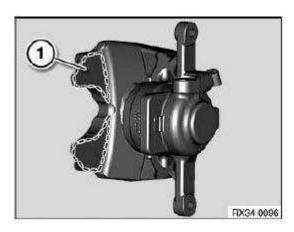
Identifying Contact Face Of Brake Calliper Courtesy of BMW OF NORTH AMERICA, INC.
